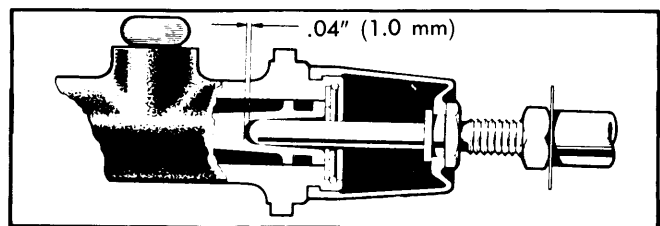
Illustrating Push Rod-to-Master Cylinder Piston Clearance on 911SC Models
